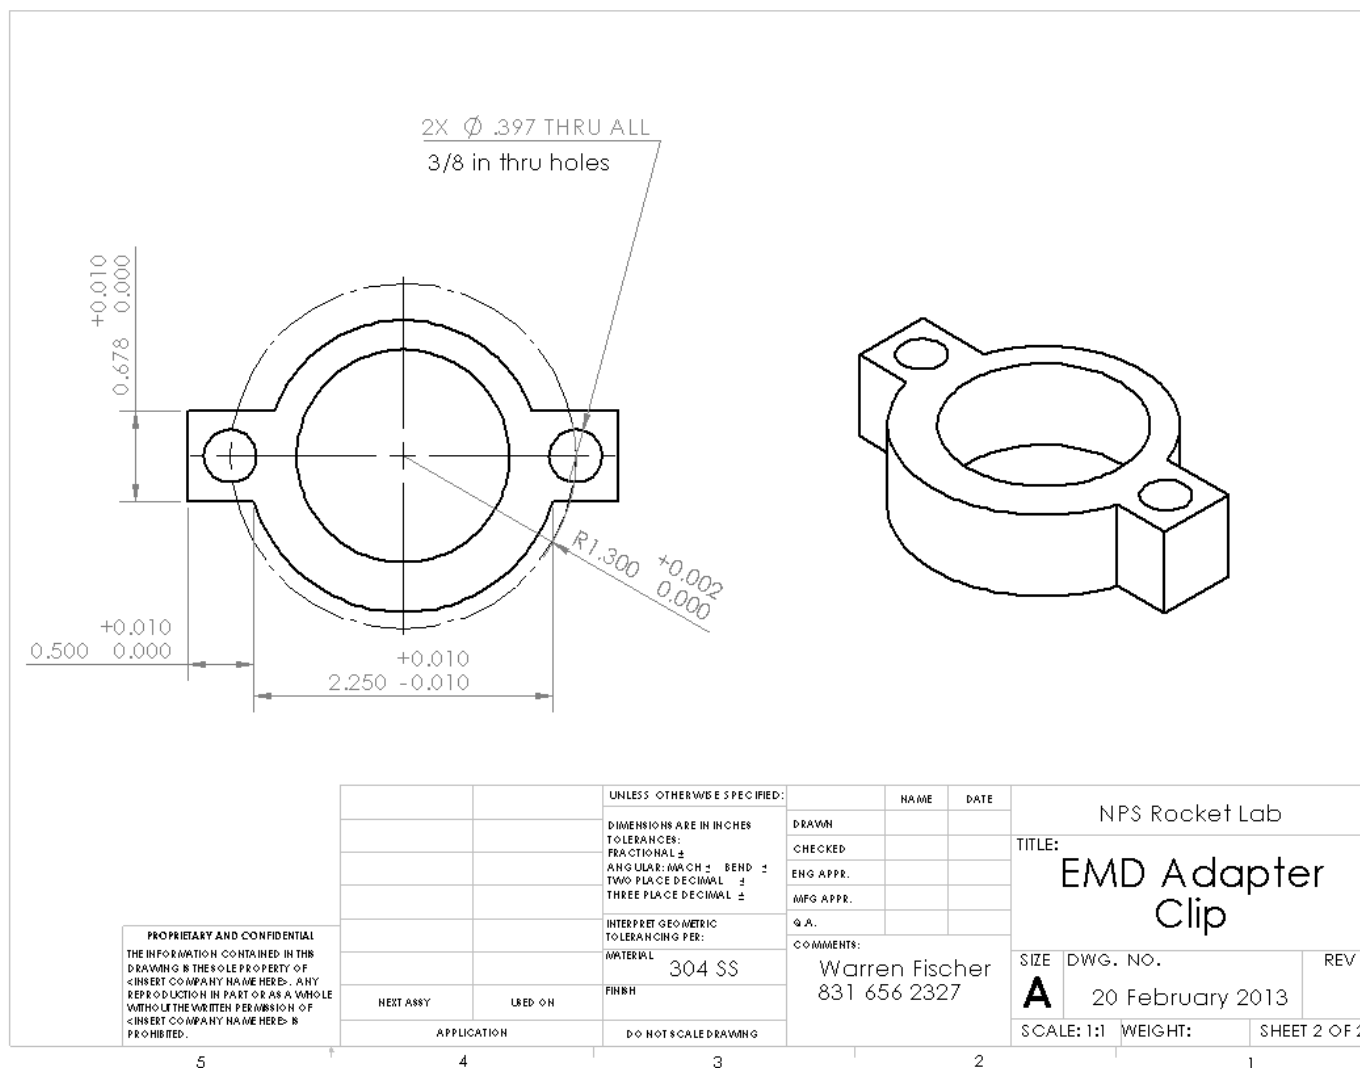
EMD Injector Adapter Clip Fabrication Drawing (View 2 of 2)
